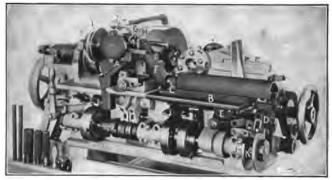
No. 00 Brown & Sharpe Automatic Screw Machine equipped with a Screw-slotting Attachment
